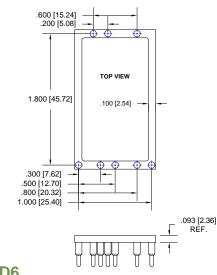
Thru-Hole: C10-1822-08-01-433E-R27-L14 Surface Mount: C10-1822-08-01-285E-R27-L14
